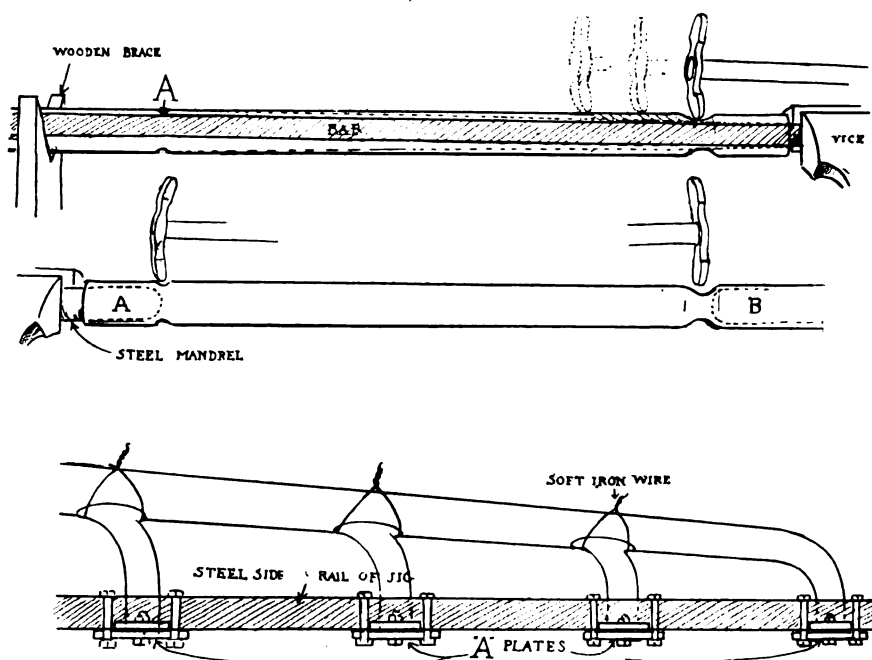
The upper drawing shows the application of a bent steel bar in commencing the tapering of a tube. The sinking of the grooves by courses of light, quick hammer blows is shown in the second. In the lower drawing the manifold and branches are shown wired in place for brazing on the steel jig
